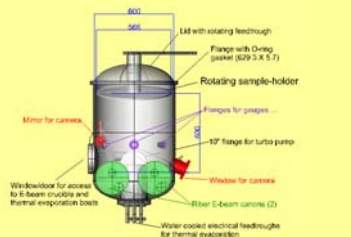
The Evaporator is made in the shape of a cylinder. The lid in the top is closed against a rubber O-ring. Several flanges are welded on for the different equipment. A camera system with an adjustable mirror makes up the evaporation monitor system
